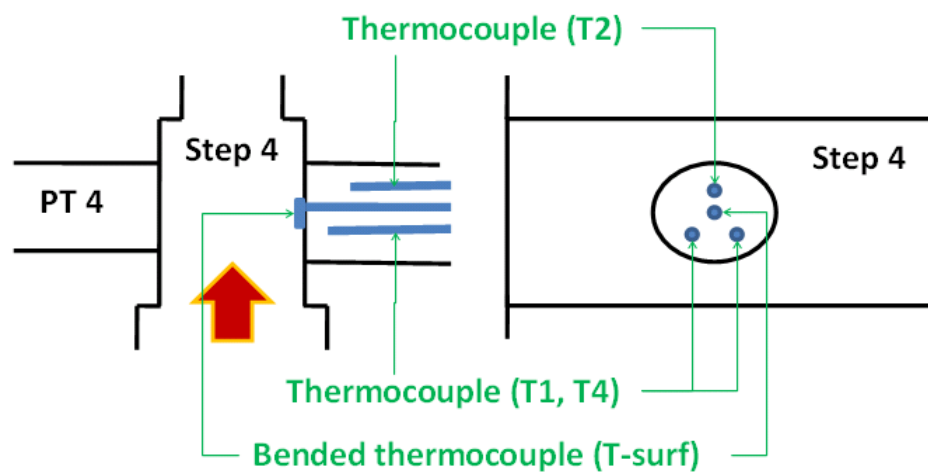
3. Installation of thermocouples measuring casting surface and inside die temperatures
